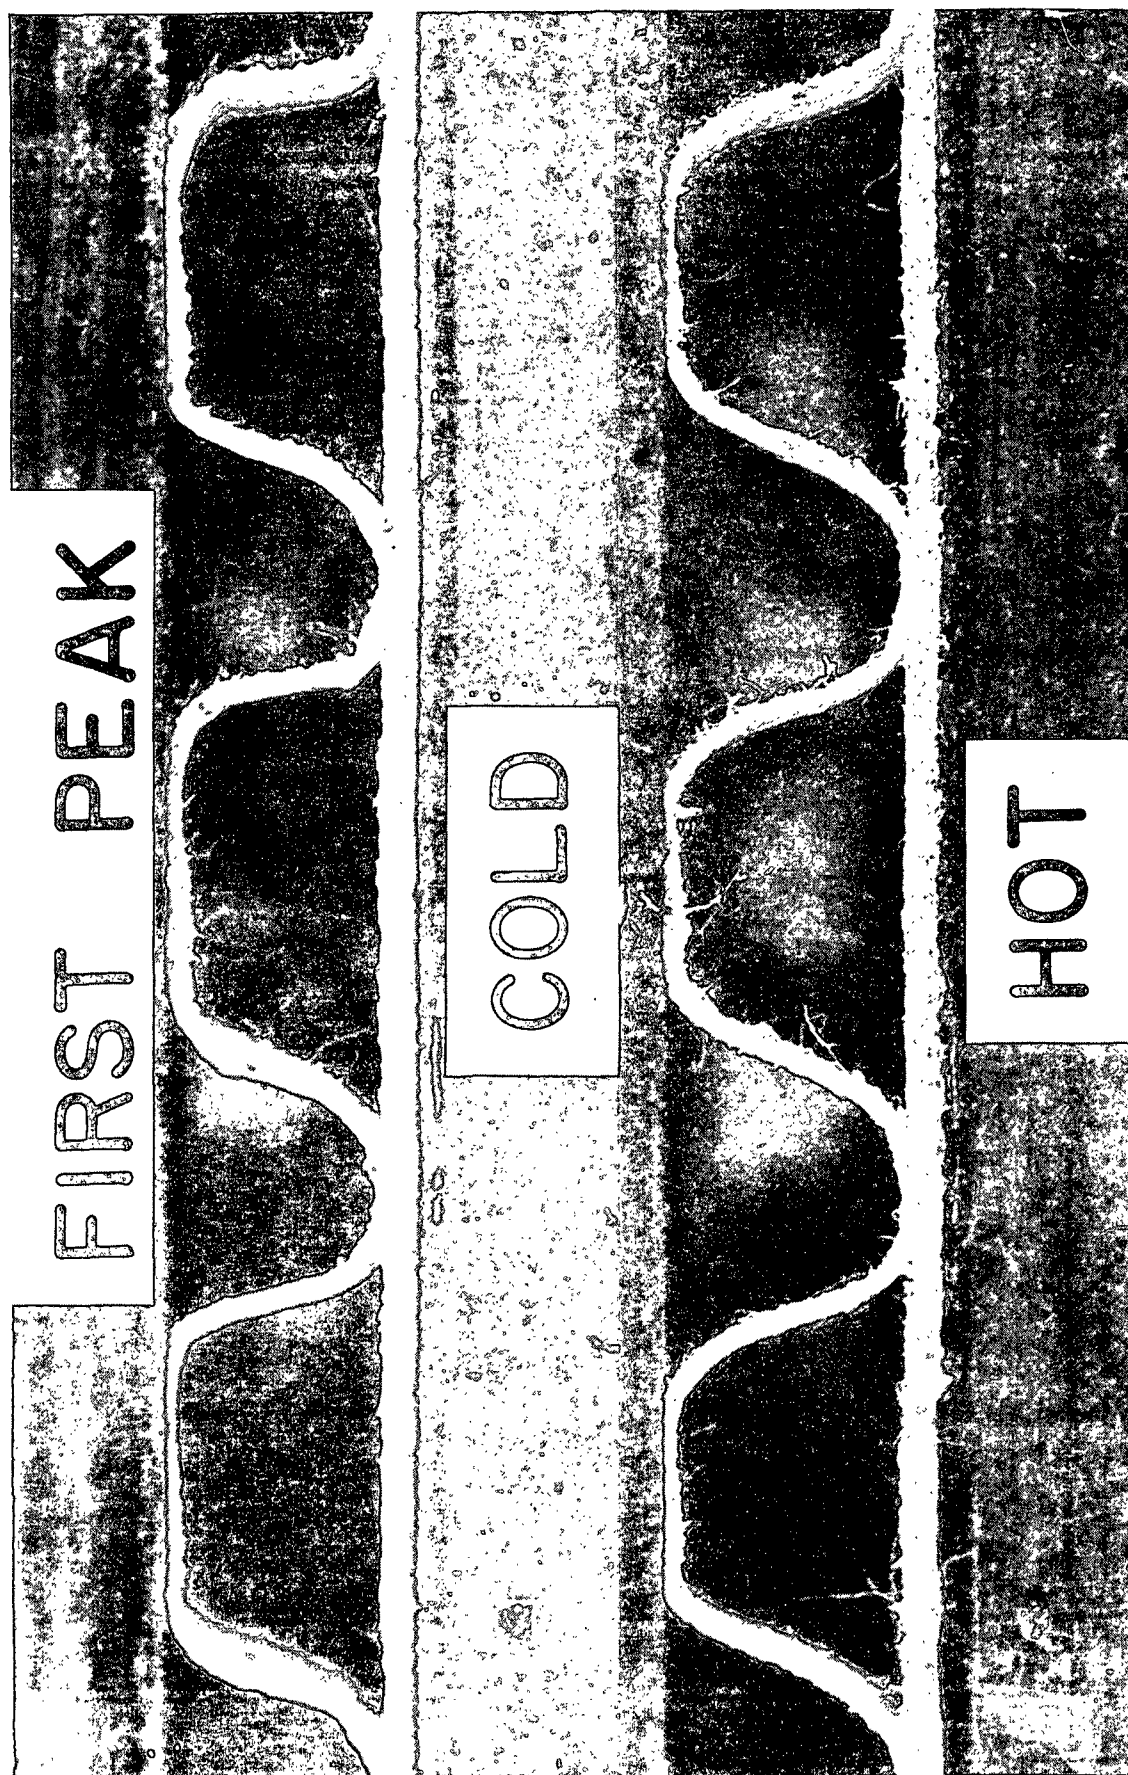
Appearance of cold and hot formed board at flat crush failure (trailing flank to right).
